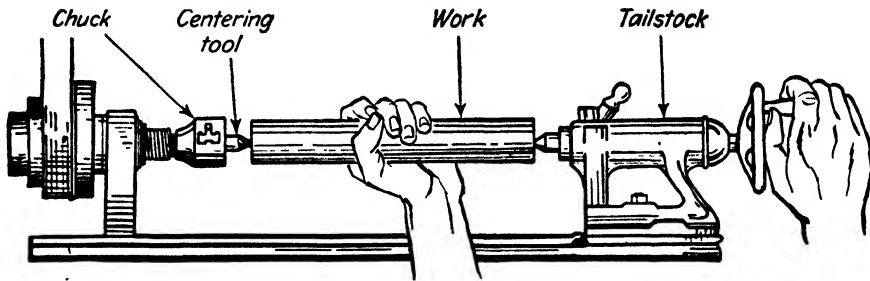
Drilling a center hole in the end of a shaft. (South Bend Lathe Works)
